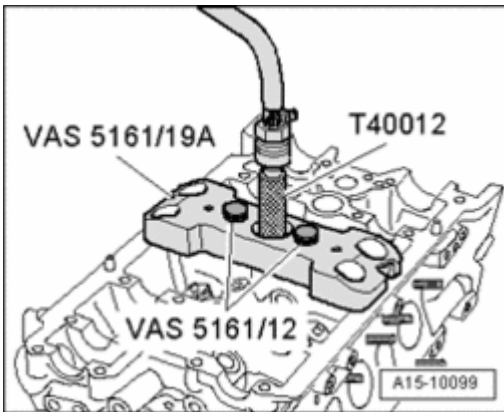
Placing Guide Plate VAS 5161/19 A From Valve Cotter Disassembly And Assembly Device VAS 5161 On Cylinder Head
